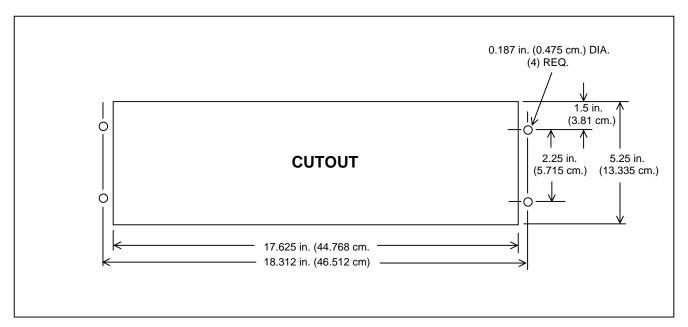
Mounting dimensions, RFL 9780 Programmable FSK Powerline Carrier System
